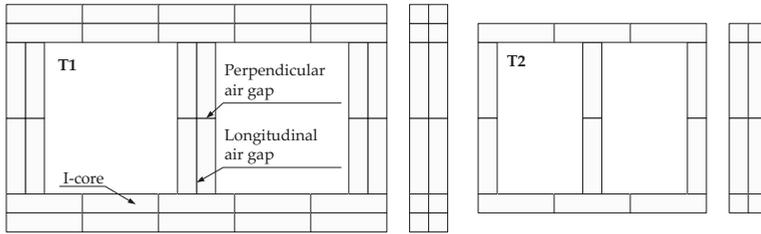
Medium frequency transformer core assembly composed of elementary I-cores: T1 (left) and T2 (right).
